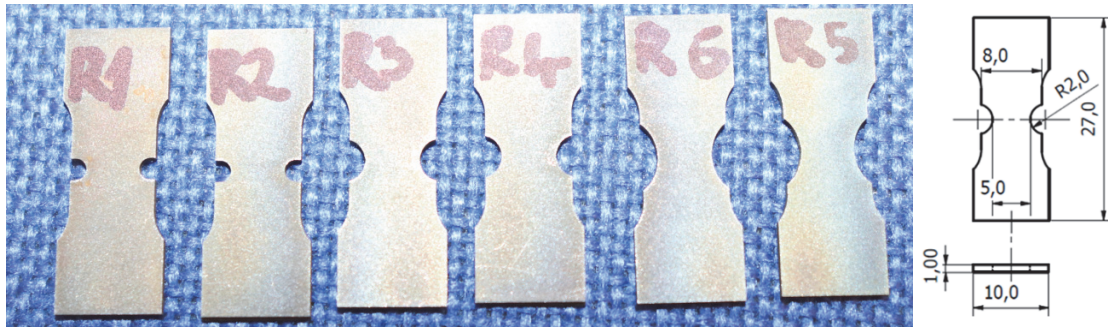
Small flat notched tensile specimens (left), Dimensions of notched flat tensile specimen (right).
